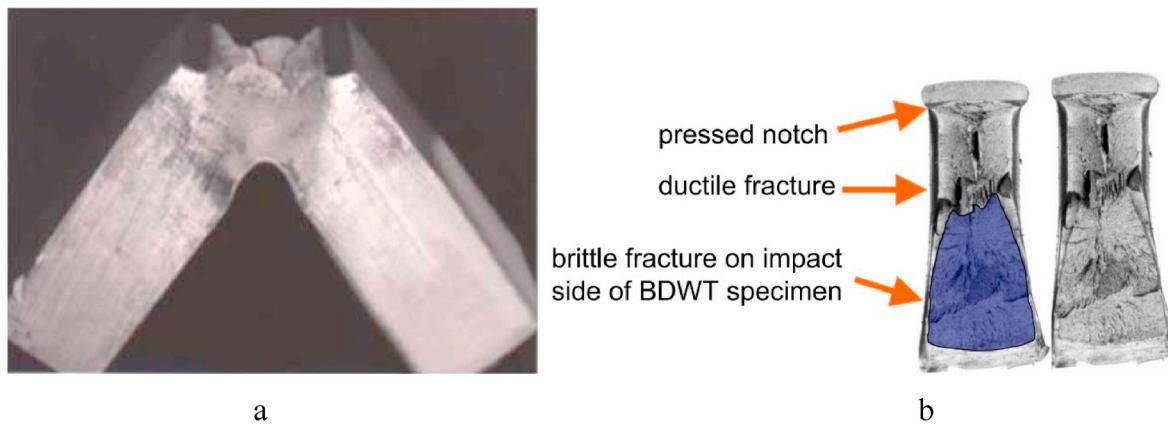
Unbroken Charpy specimen [10] (a) and the inverse fracture appearance in DWTT [11](b).
